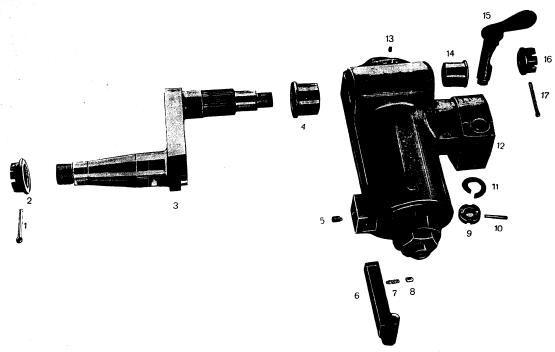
SPRING DEVICE WITH HELICAL SPRING — DISMANTLED (for weapons B1A2, B1A3 and B1A4)
